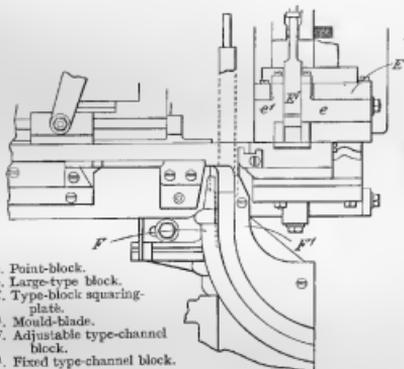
Monotype casting machine; large-work mould-delivery and raceway.
